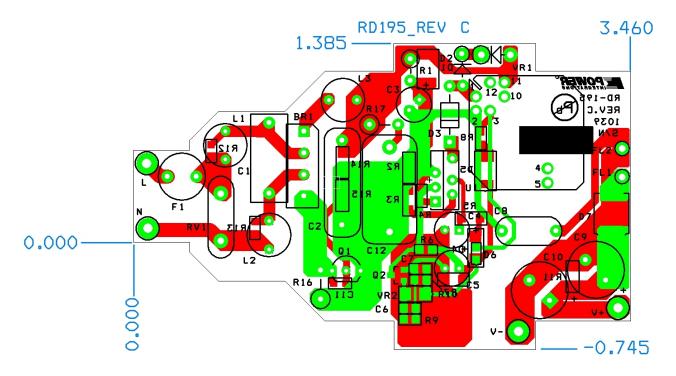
Printed Circuit Layout (Dimensions in Inches).
